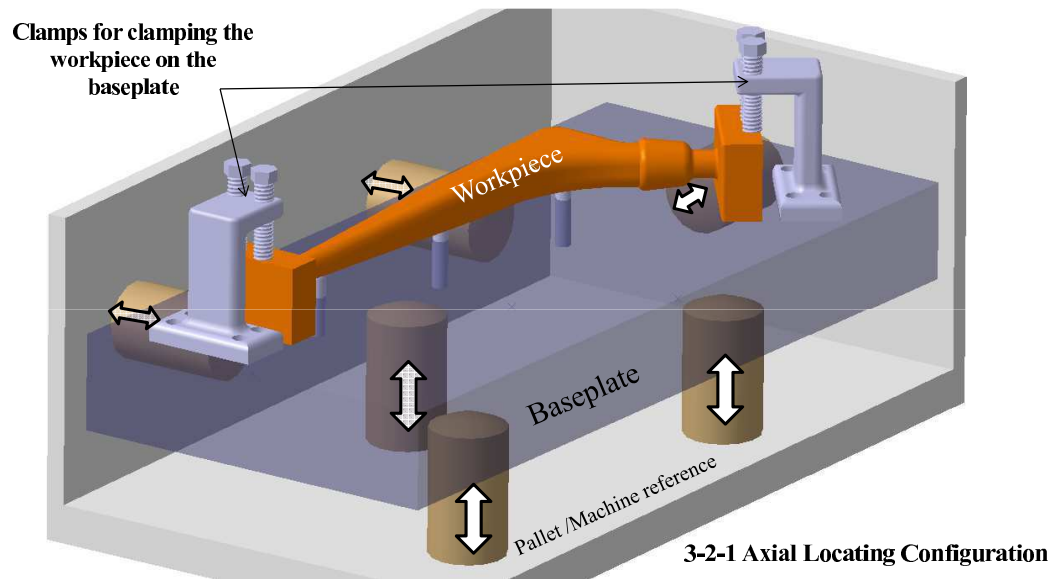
Rough workpiece is placed on the proposed fixturing system
